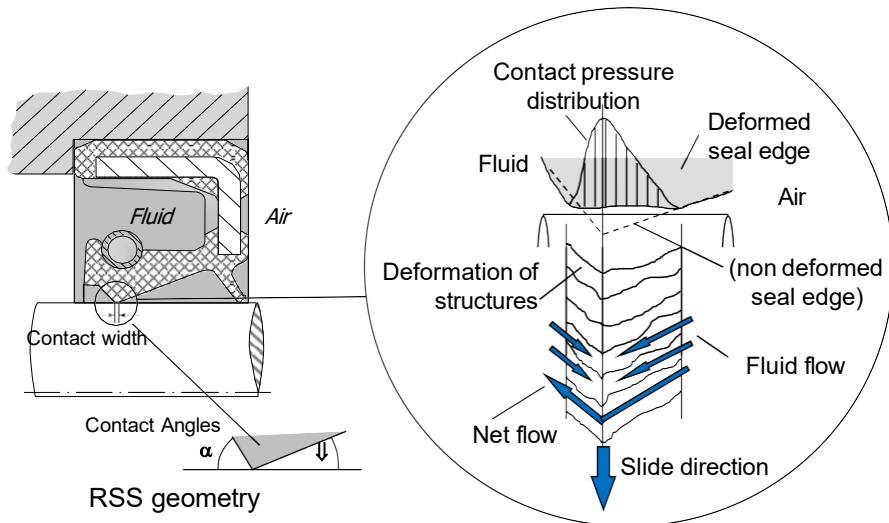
Radial shaft seal and explanation of pumping mechanism according to Kammüller
